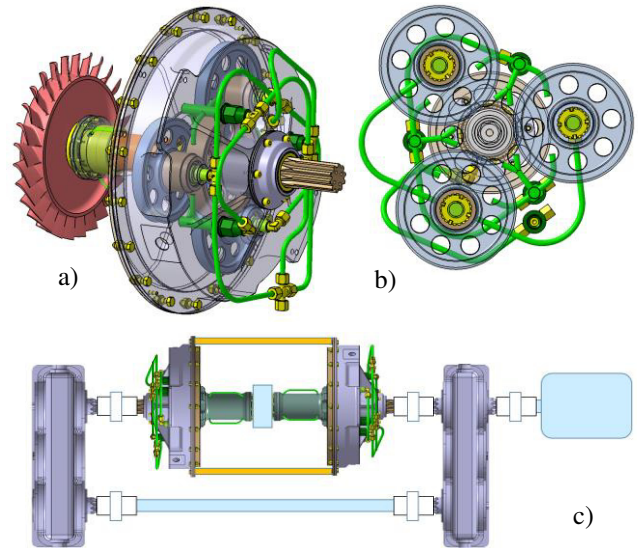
Reducer of turbo-shaft motor: a) reducer design, b) bilateral lubrication of gears, c) test stand with power circulation
